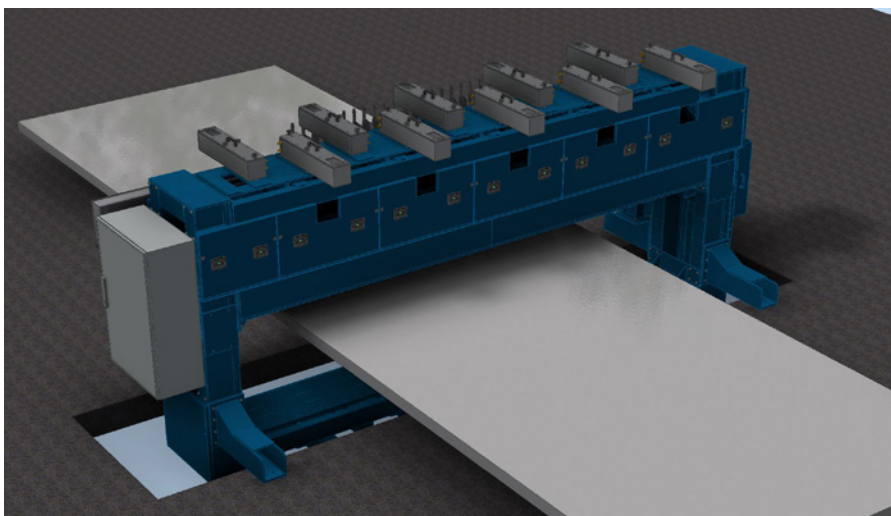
General view of the measuring equipment-capable laser measuring system for the final inspection of roll-bonded plates (Copyright: nokra, now part of KELK)
